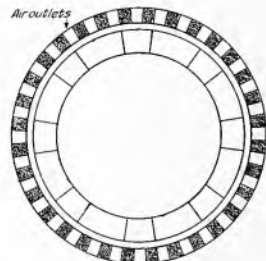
Plan Section of Stator showing Openings for Air Discharge
